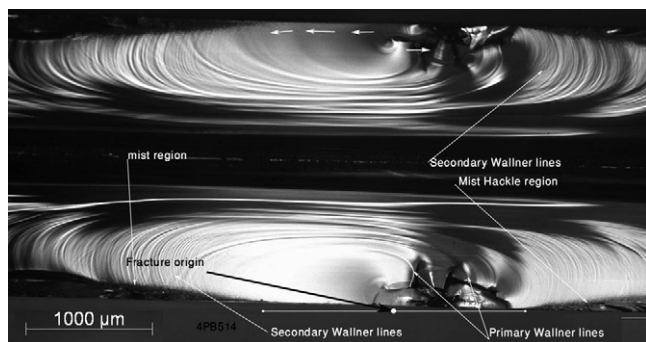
Fractography of cracked coated sample tested in 4 pb test section view for the fracture surface.
